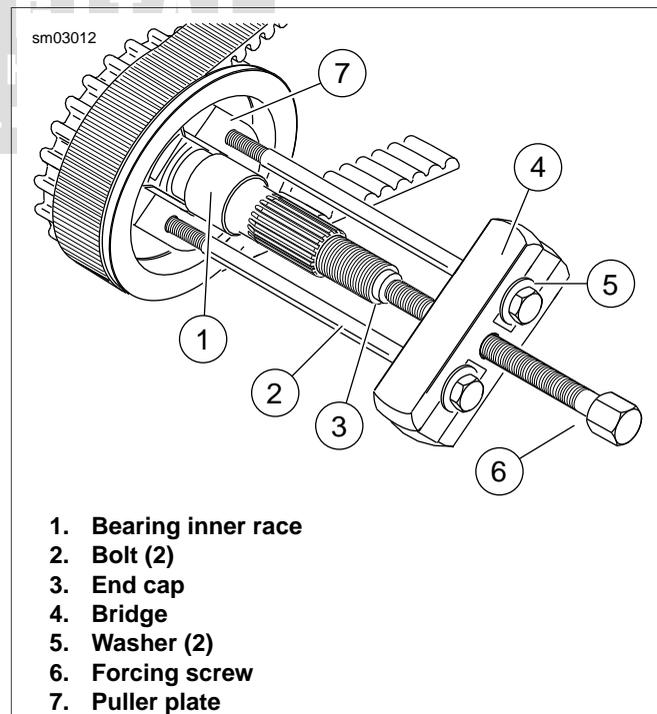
Pulling Mainshaft Inner Bearing Race
